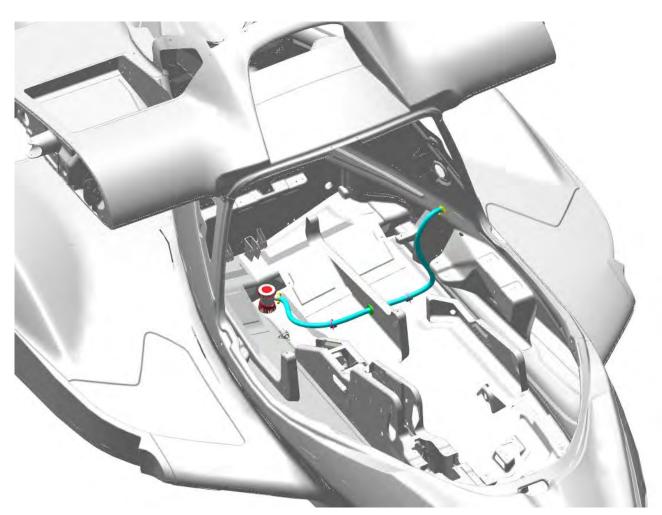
BILGE PUMP INSTALLATION AND OUTLET ROUTING
